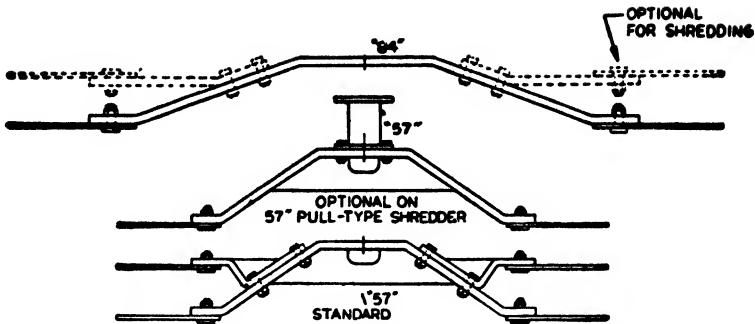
Types of horizontal rotating knives used for shredding medium-size brush.
